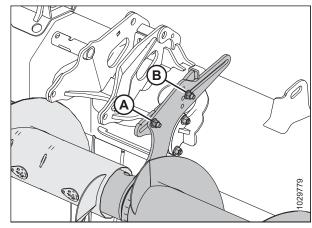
Initial Position of Adjustable Mounts – Three-Piece Auger
